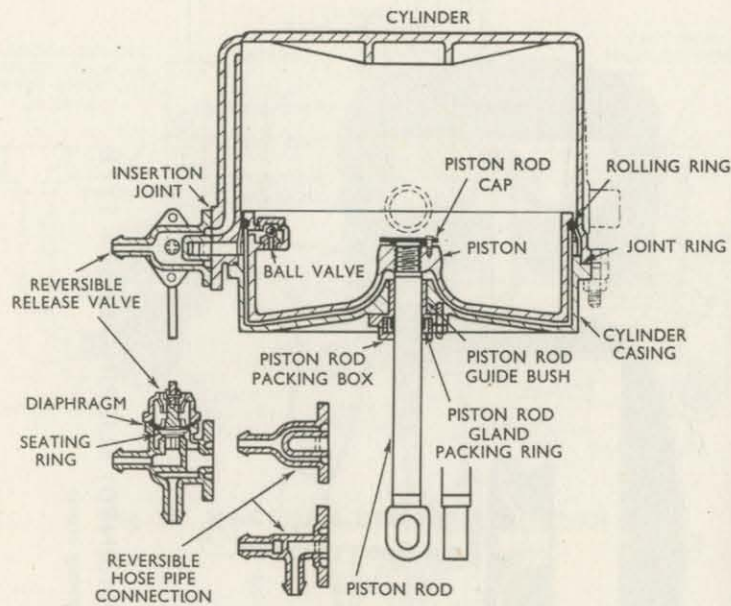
VACUUM BRAKE SEPARATE CYLINDER
